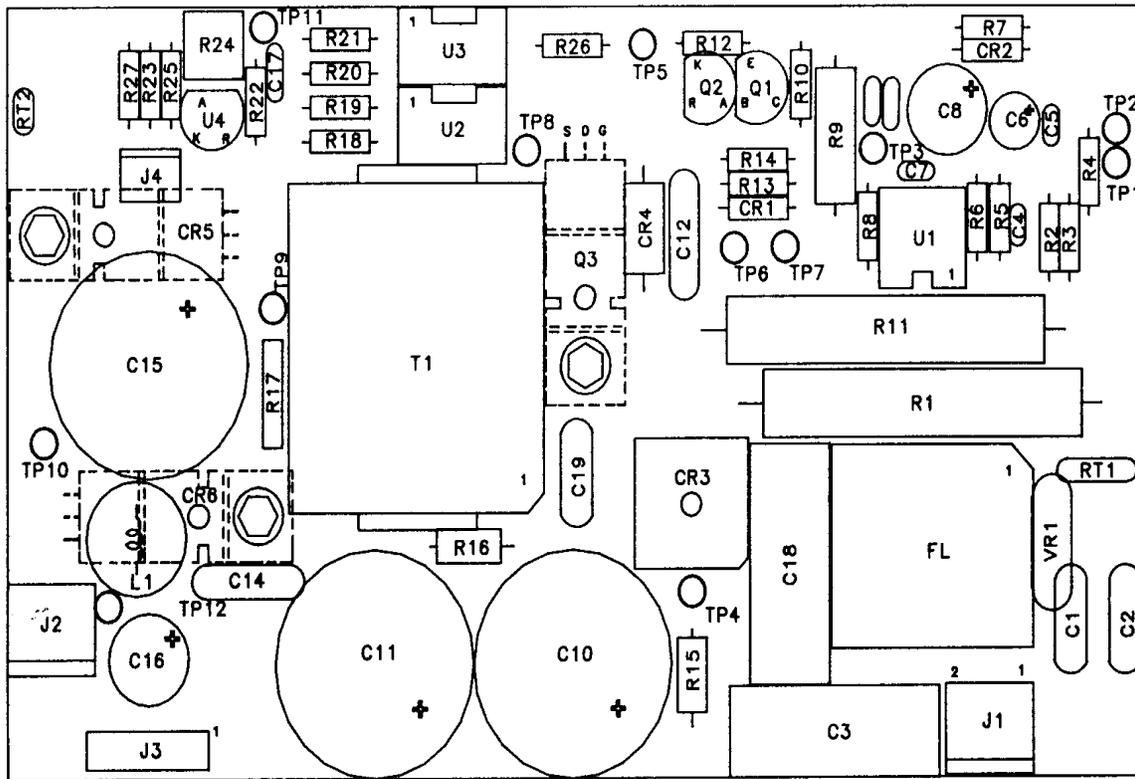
A2 Control Board Assembly, Schematic Diagram
